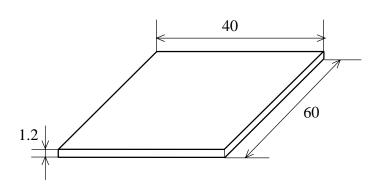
Dimension of die-quenched steel sheets for small clearance punching.
